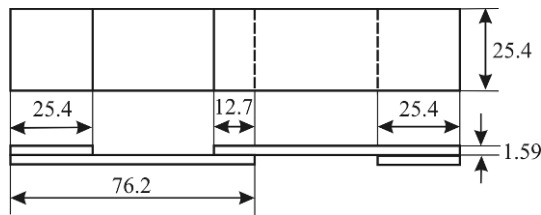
Single-lap joint for tensile testing; dimensions in mm.
